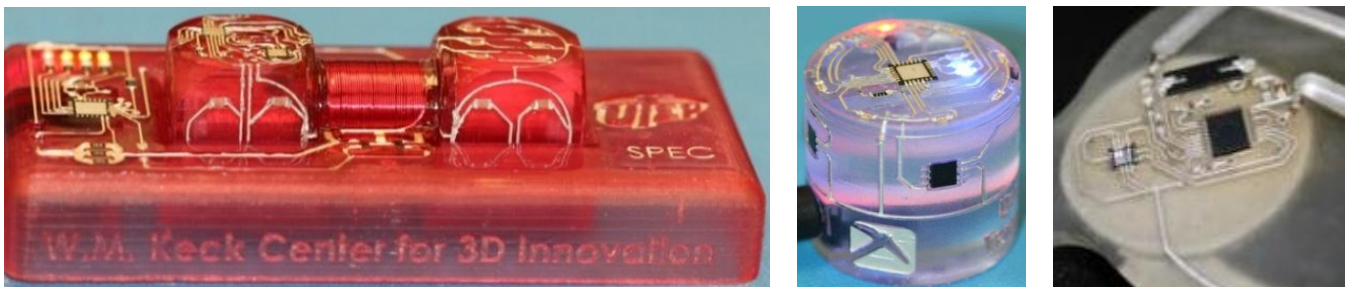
3D printed dice and charger, 3D printed magnetometer and 3D printed accelerometer.
